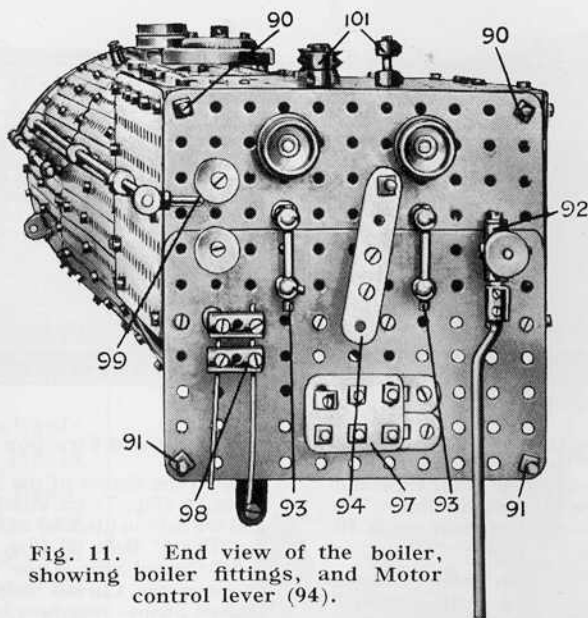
End view of the boiler, showing boiler fittings, and Motor control lever (94).
